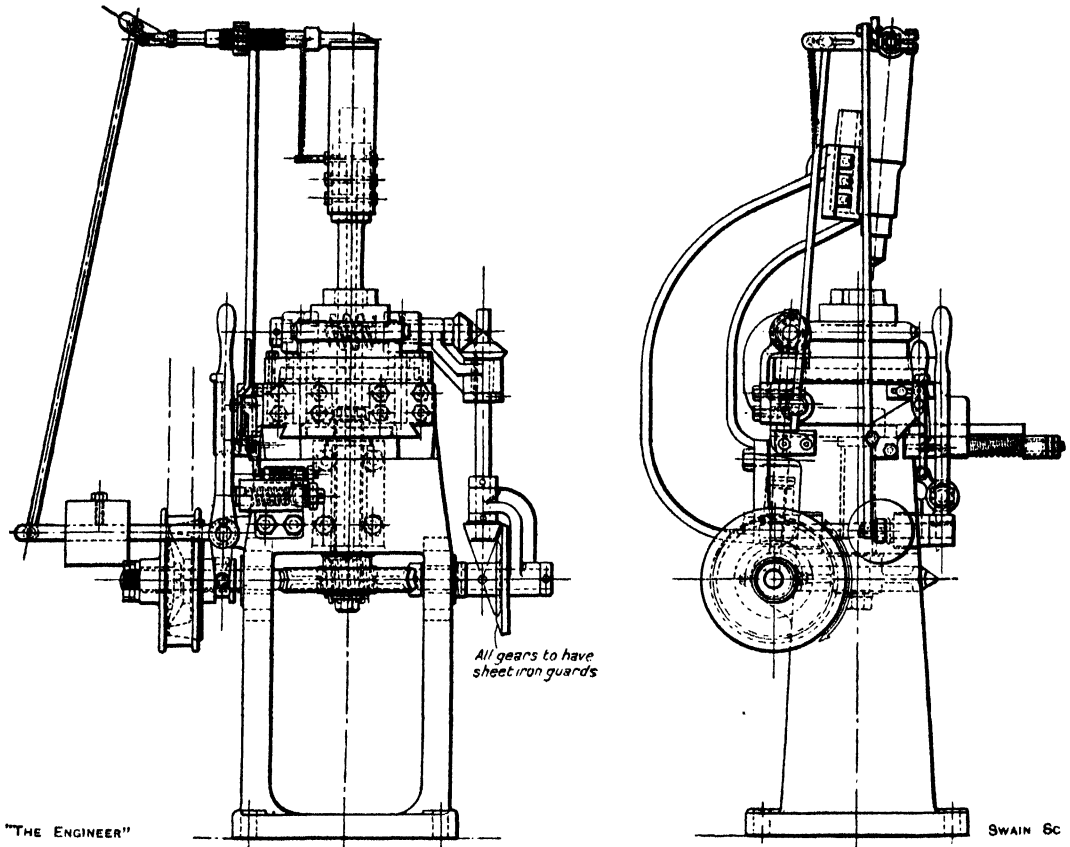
PNEUMATIC DIE-BATTERING MACHINE—ALLDAYS.
